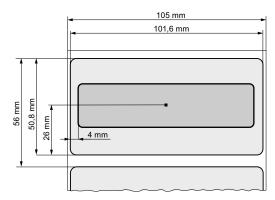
SIMATIC RF630L 6GT2810-2AB01 dimension drawing
